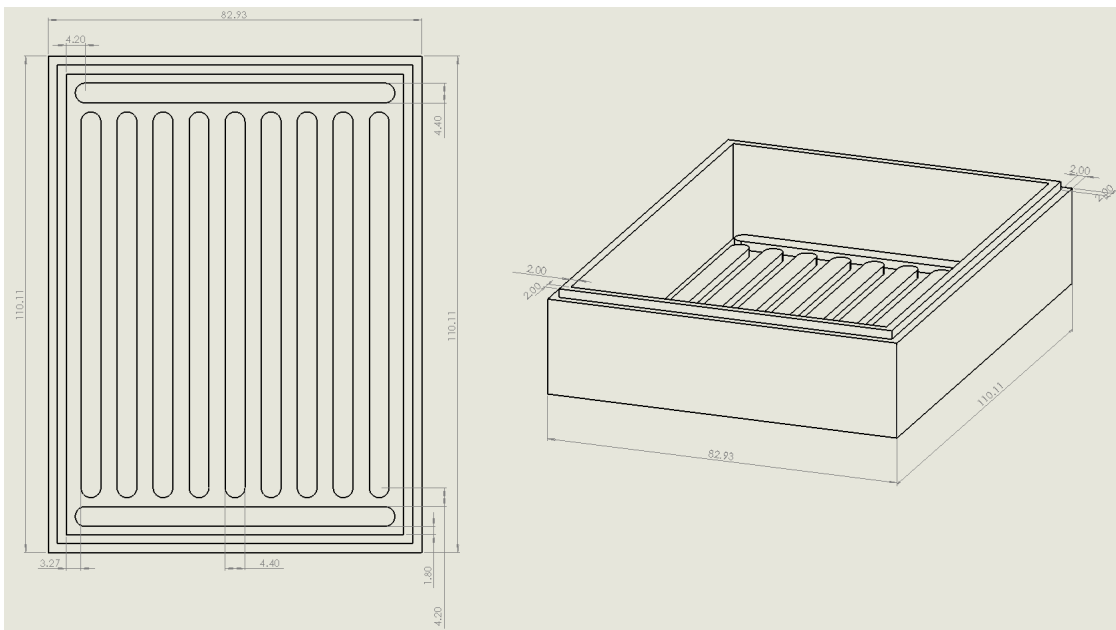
A SolidWorks drawing of the Magnet-Induced Levitation Design. The left side shows a top view and the right shows a dimetric side view. All dimensions are in cm.
